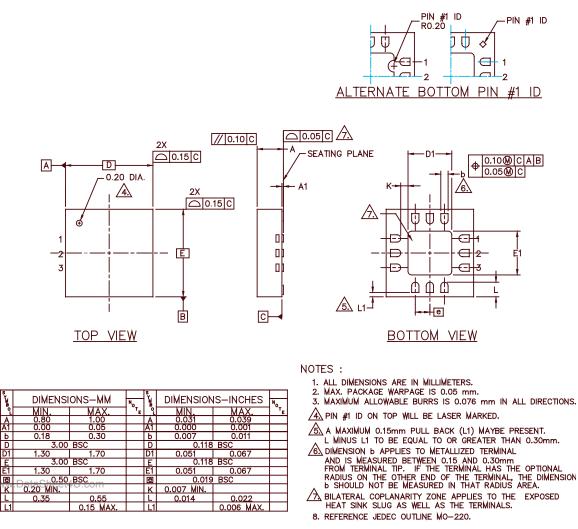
S26 Package Outline - 12 Pin 3 mm x 3 mm x 1 mm QFN
